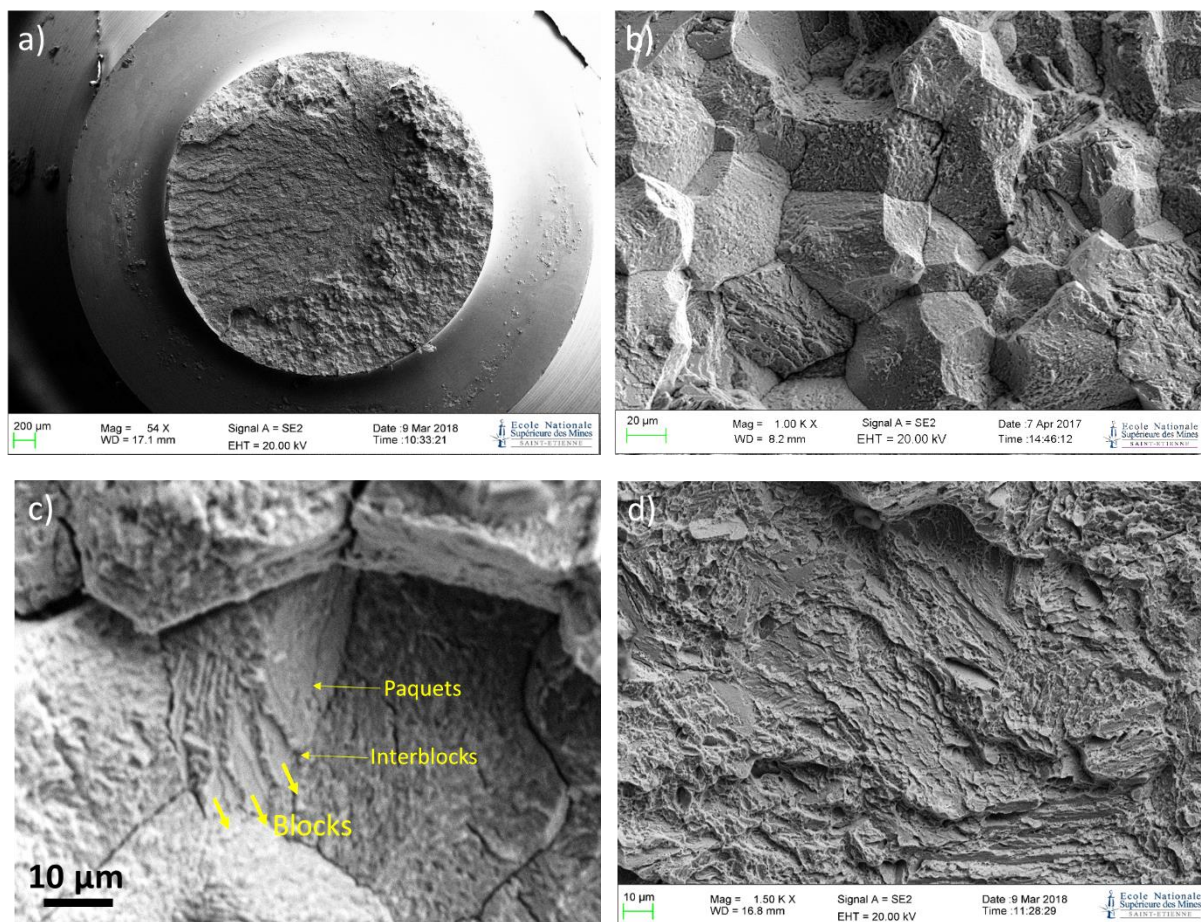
Fracture surfaces of the tensile test at displacement rate of 10^{-4} mm/s under hydrogen cathodic charging.
